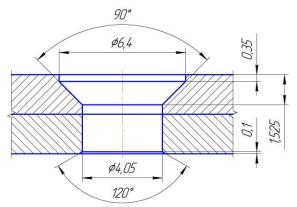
Dimensions of hole for installation of rivets (all dimensions in mm)
